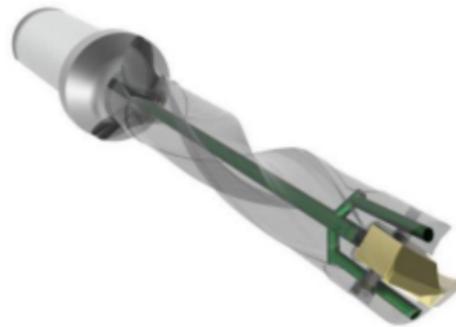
Coolant ducts in the conventionally fabricated drill base body
